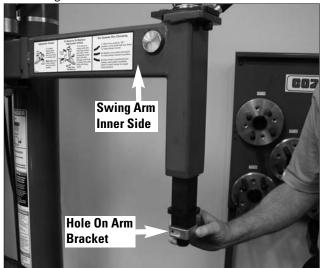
Position Hole On Arm Bracket To Face Inner Side of Swing Arm
